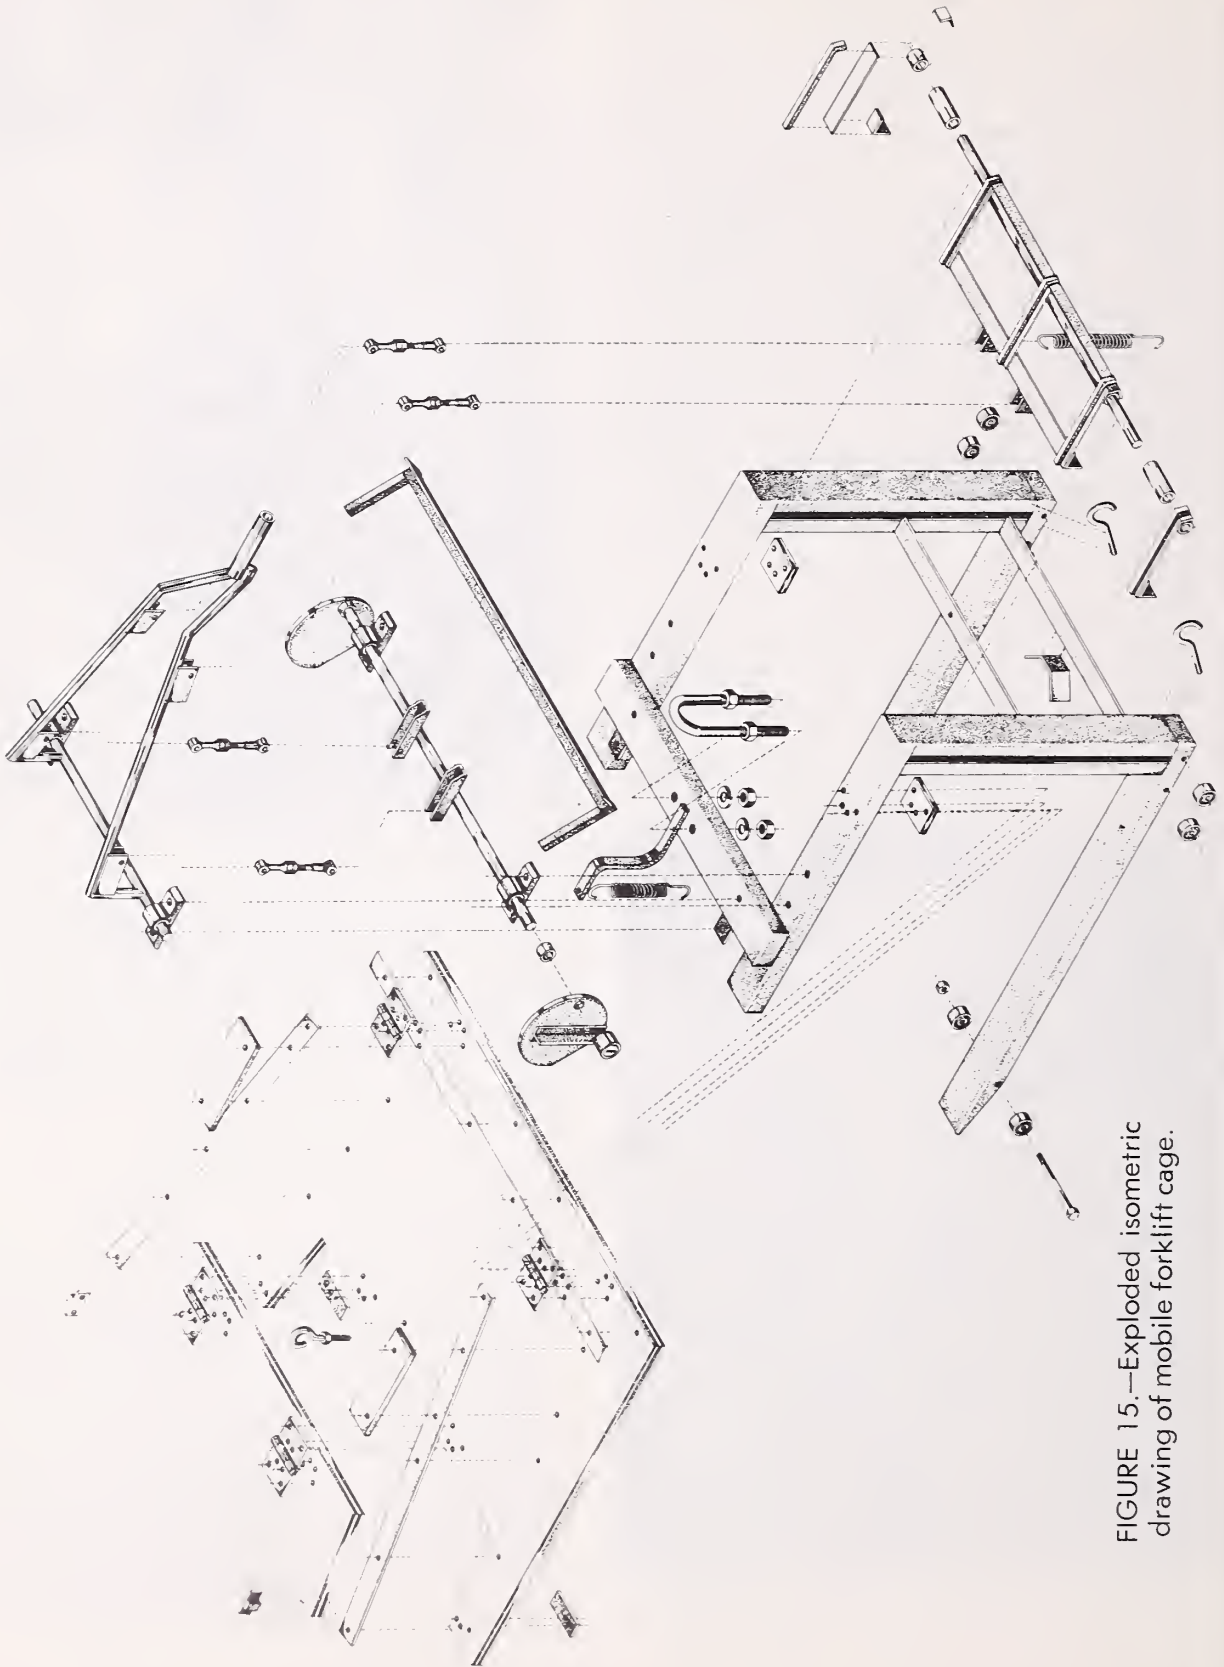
Exploded isometric drawing of mobile forklift cage.
